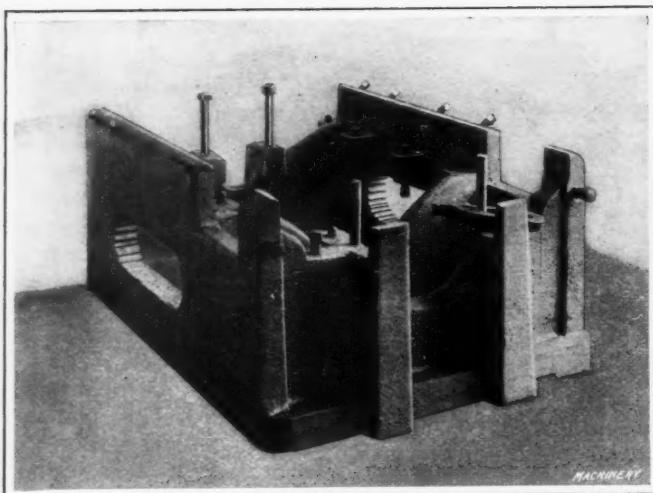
Planer Fixture in which Carriage is held while planing Ways, Cross-slide Lever Bosses and Other Surfaces on Under Side
